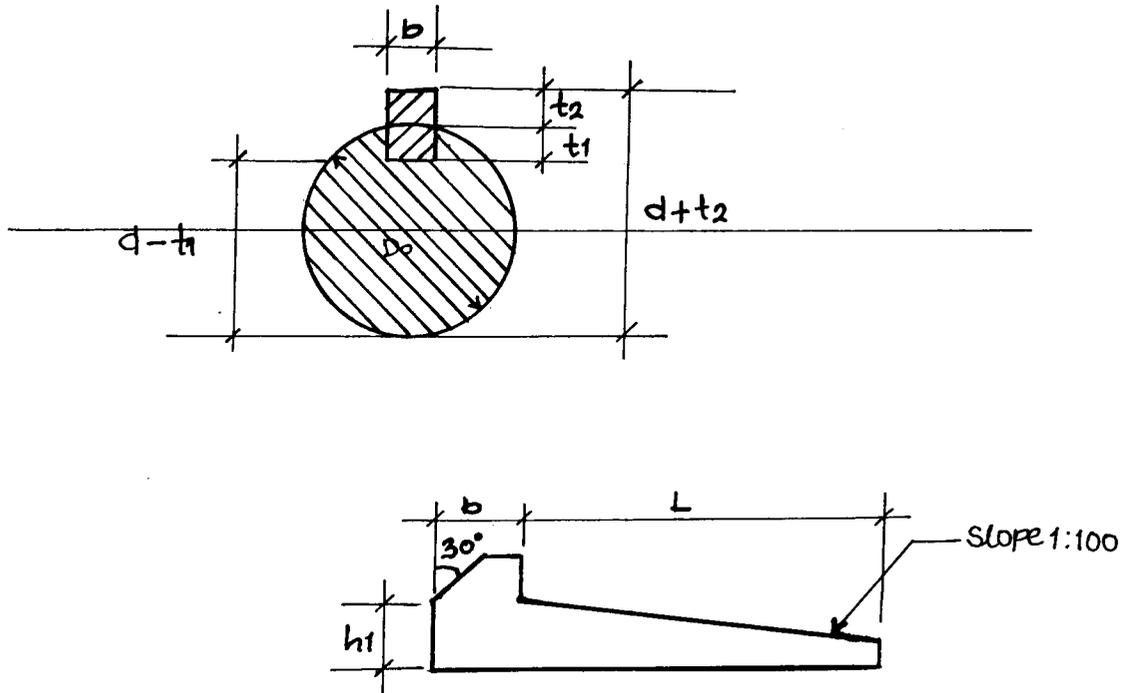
DETAILS OF KEY AND KEYWAY
